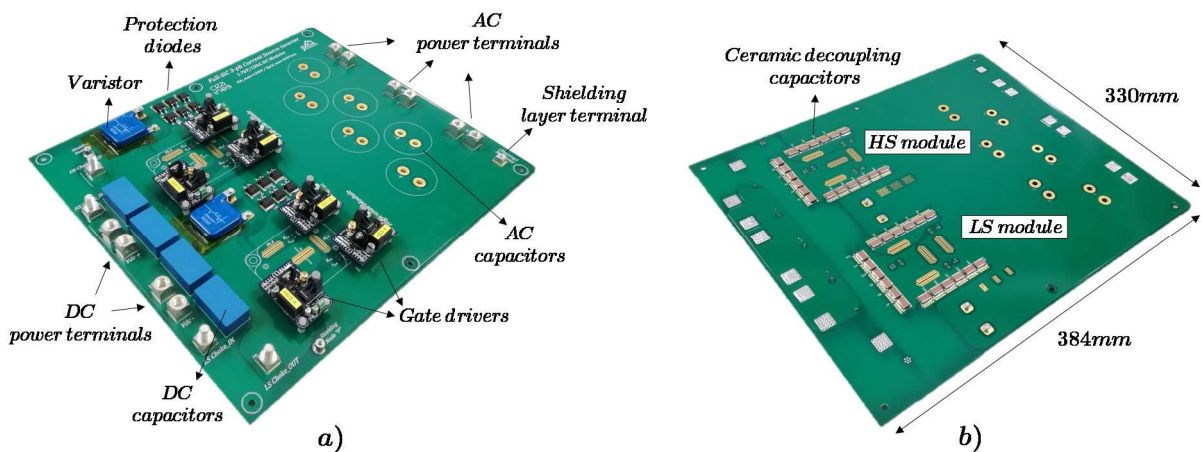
20 – a) Top and b) bottom view of the developed four-layer PCB busbar.
